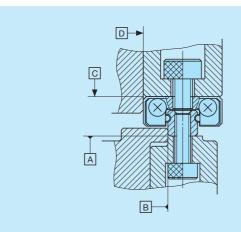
Reference mounting surface and general mounting structure of LWL 2, 3, 4 and 6.
